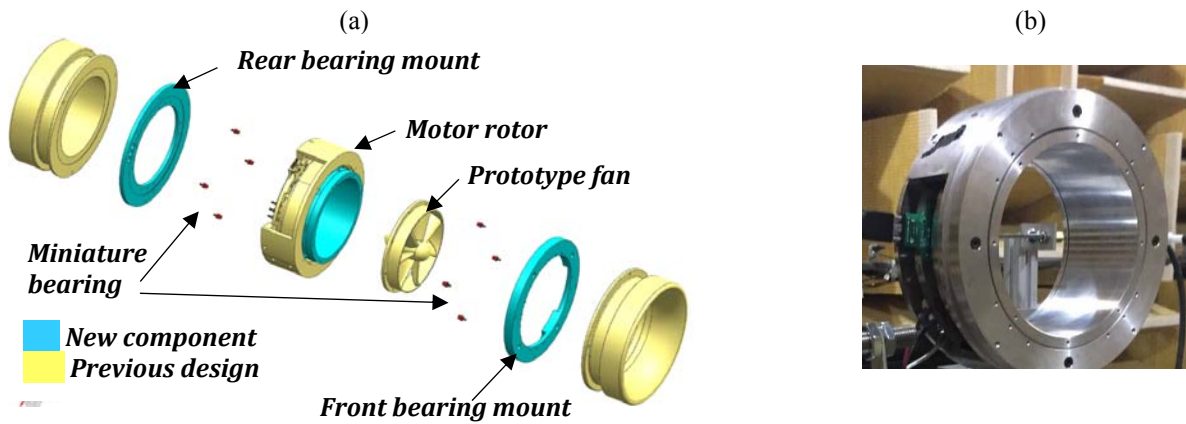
Pictures of small fan demonstrator components disassembled.
